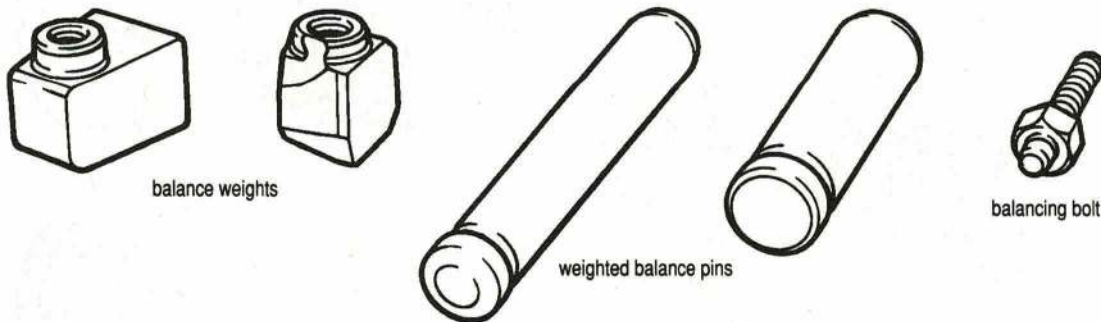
5. 9 Balancing weights for compressor, turbine discs, and stub shafts
